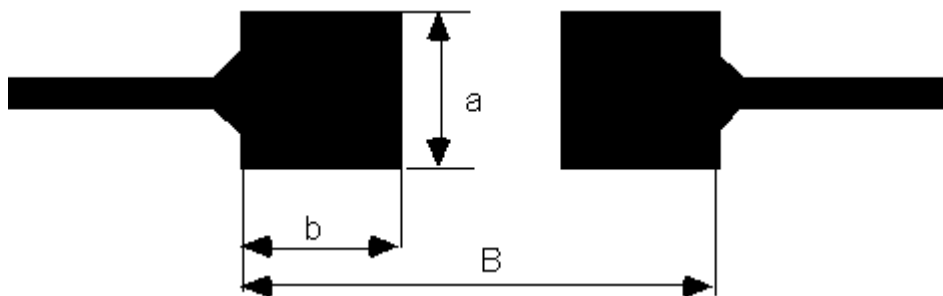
Parameters defining solder land dimensions for SMD resistors and capacitors, please refer to Table 6.2.
